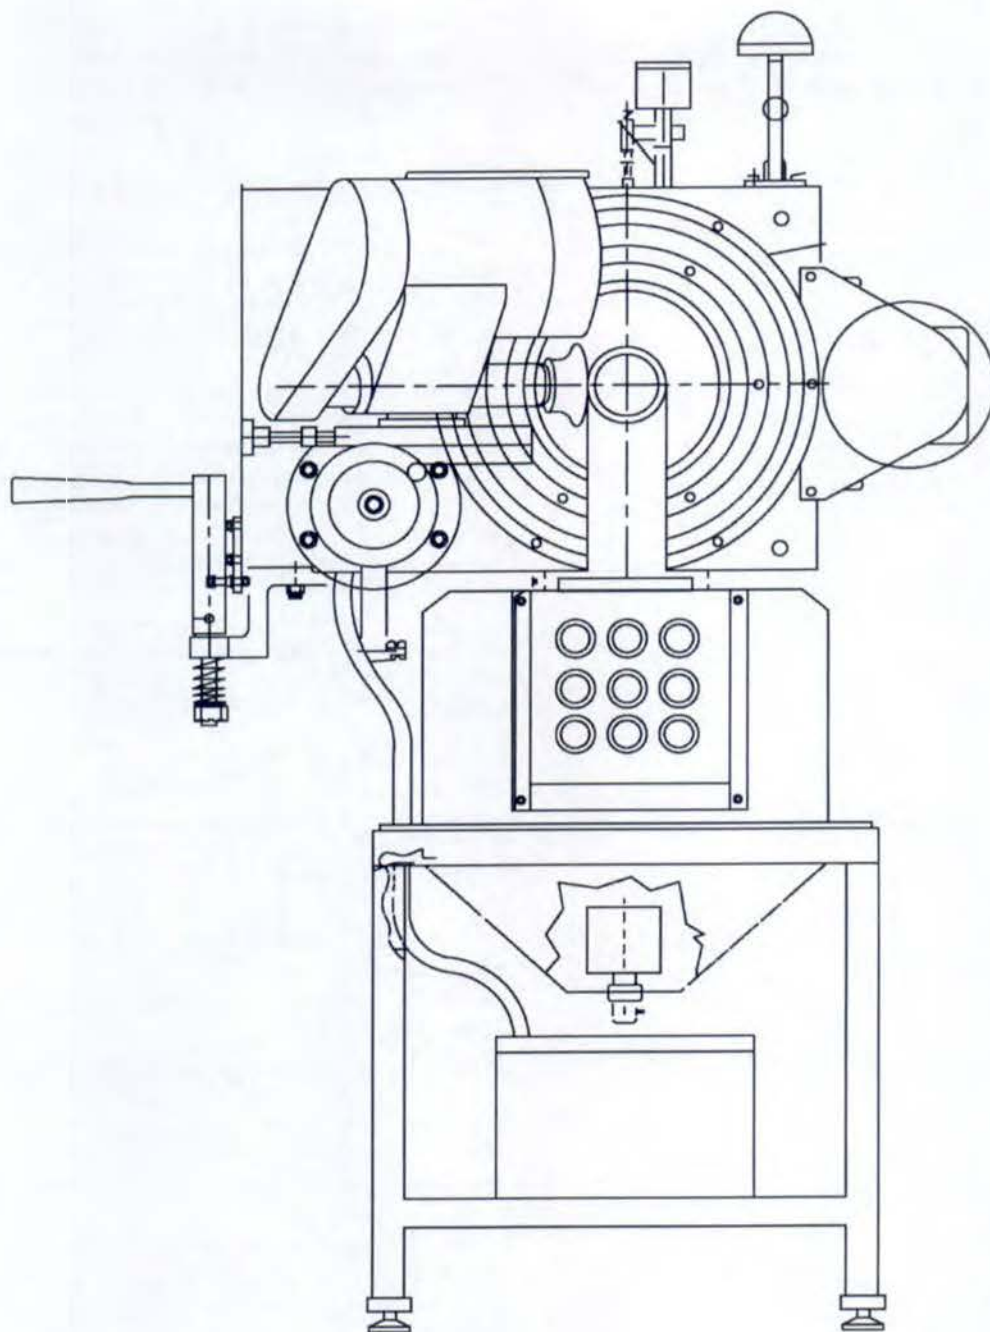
Model T1984 Beveled Thrust Washer Grinding Machine
